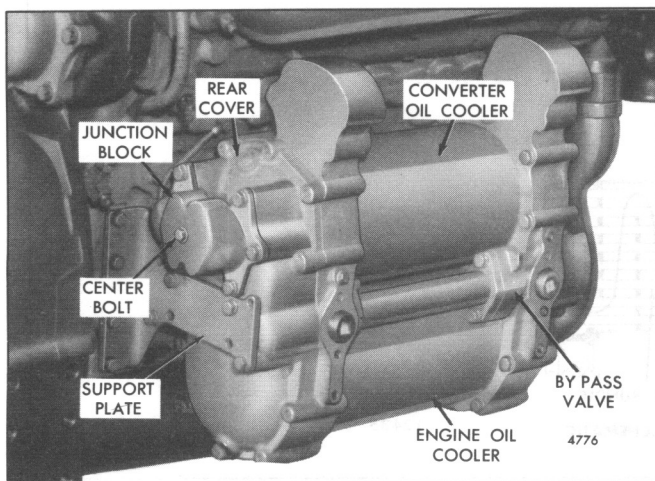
Single Tube-Type Oil Cooler Mounting
